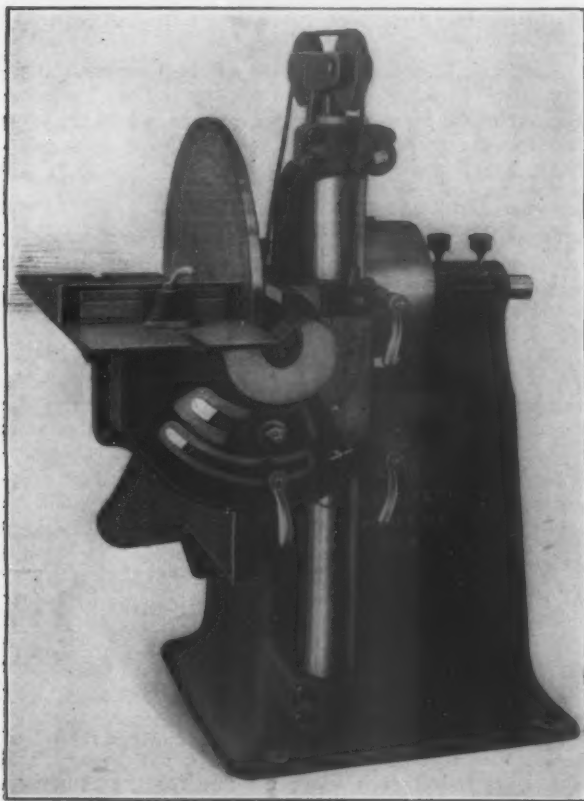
The No. 15-30-A Pattern Makers' Disk Grinder Built by Charles H. Besly & Co., Chicago, Ill.
